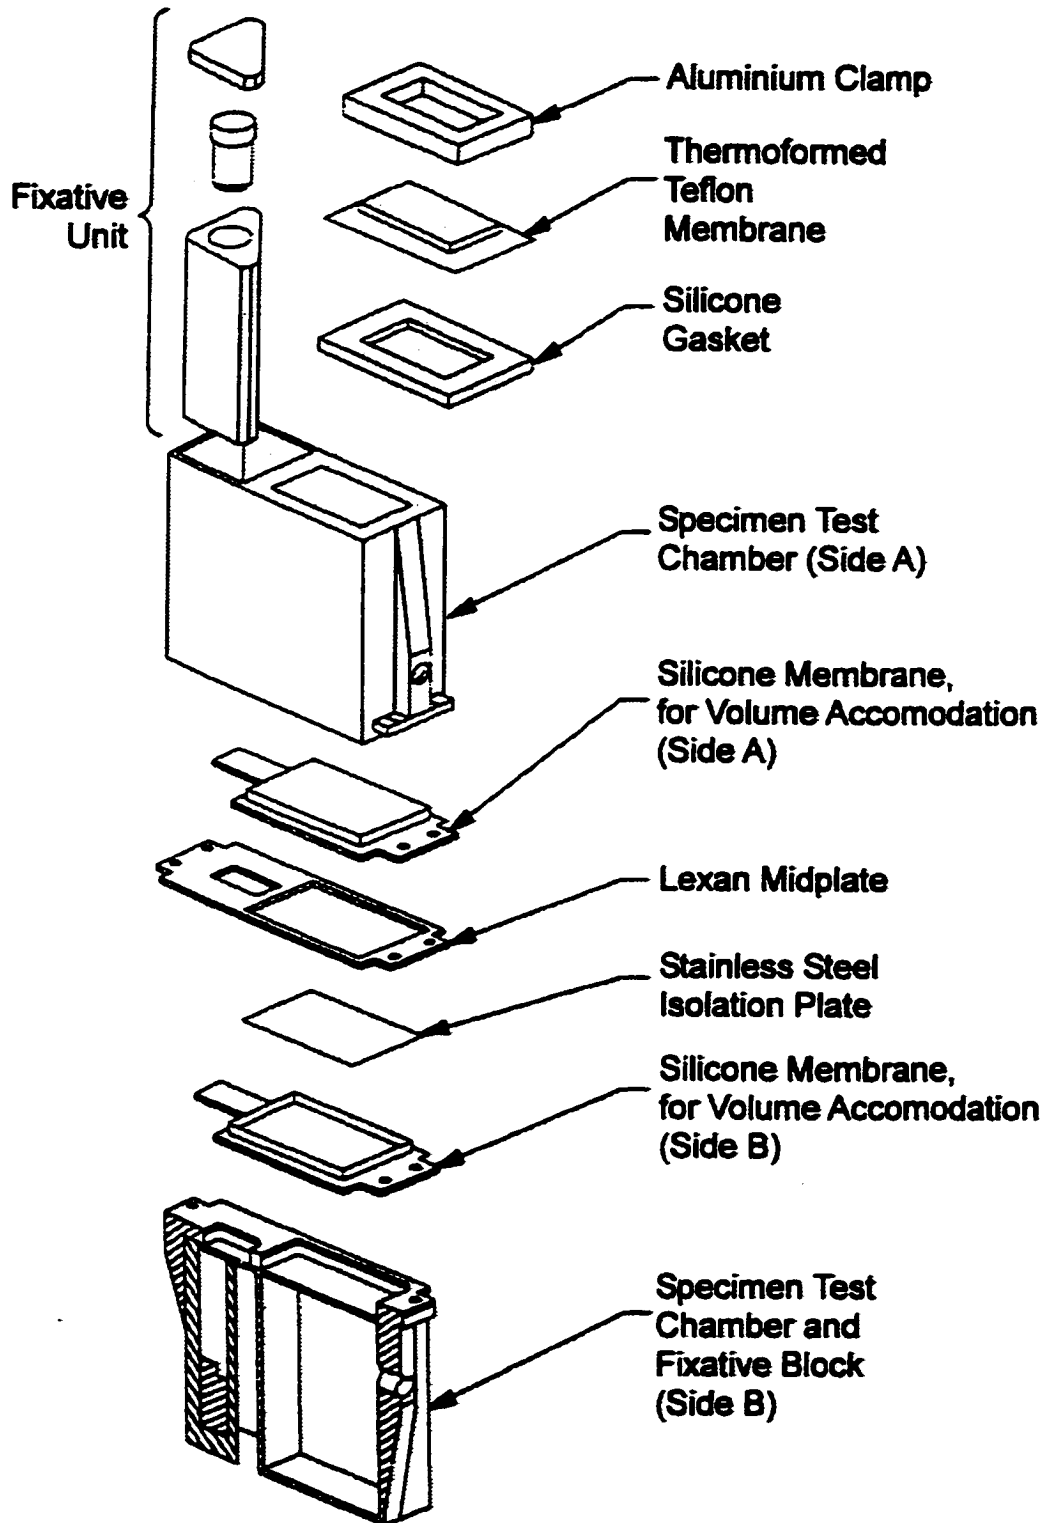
"Exploded" view diagram of a Standard Containment Assembly (SCA) Test Chamber.
